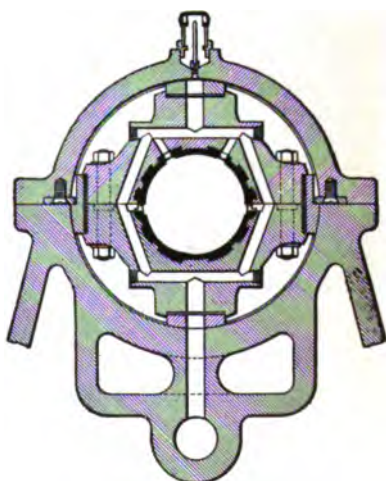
SEC. 10vv.—Bearing of Allis-Chalmers turbine, showing oil passages, end view.
